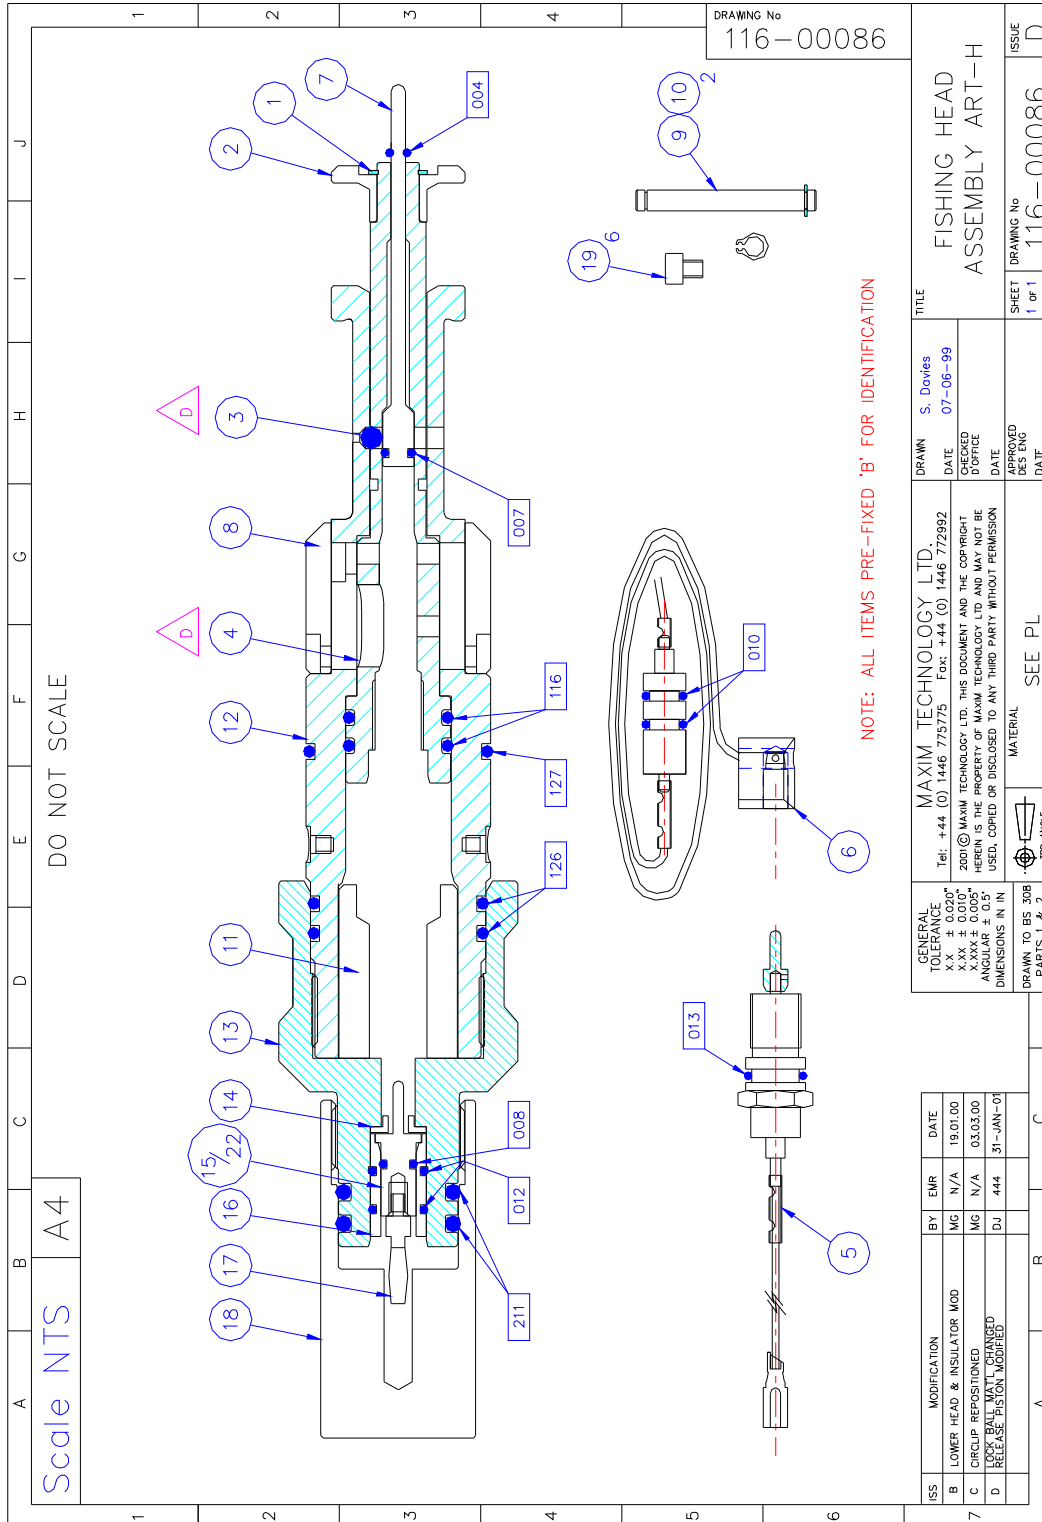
Assembly Drawing, Fishing Head, ART-H - 116-00086-D
